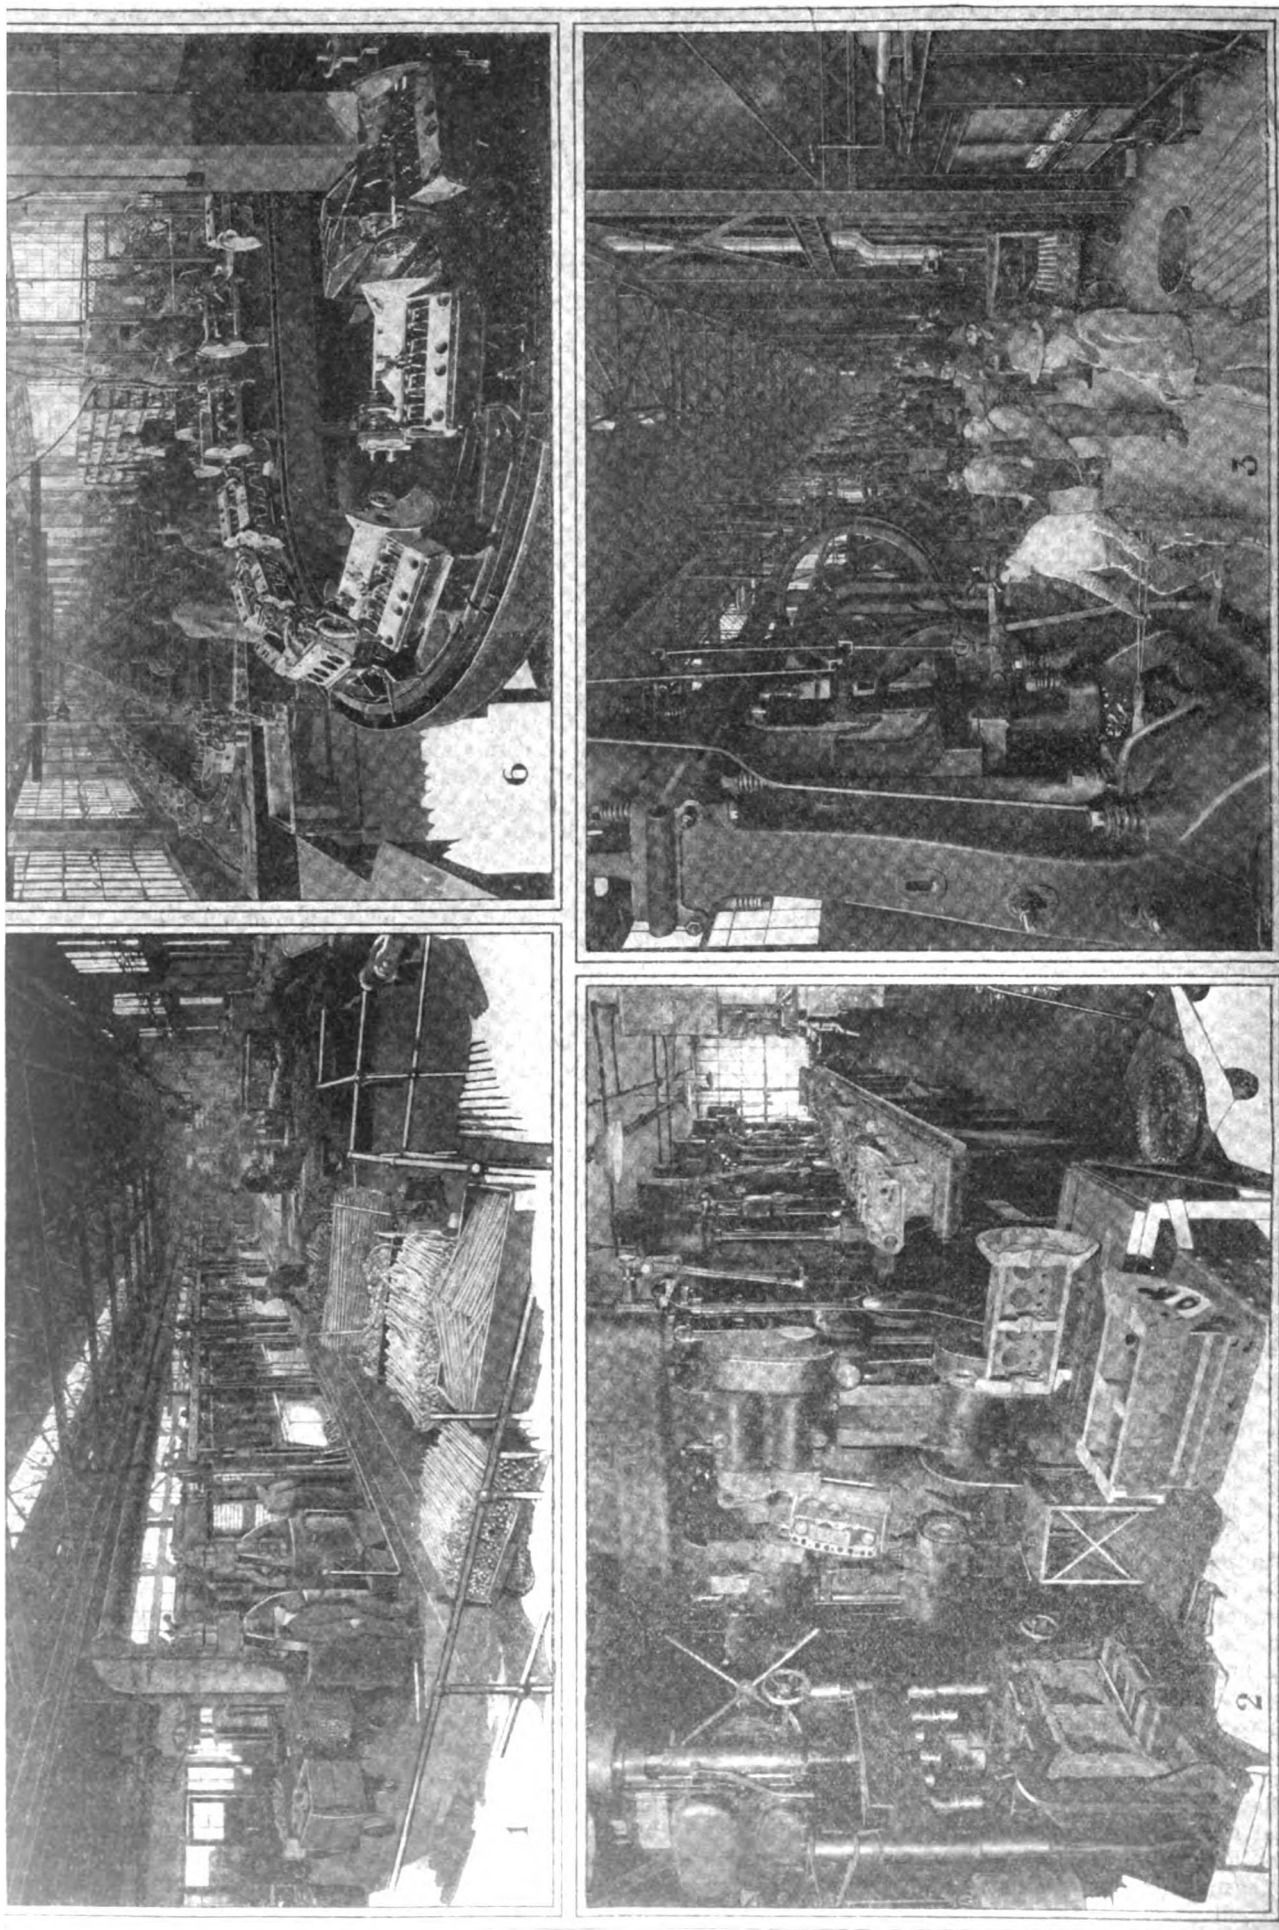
Annealing furnaces where steel parts used in Dodge Brothers cars are heat treated. Fig. 2—Newton rotary milling machine of the continuous type which rough and finish mills the cylinder blocks. The same type of machine is employed for the transmission cases. Fig. 3—Line of steam hammers used in Dodge Brothers forge department.—Note proximity of hammers to furnaces for convenient handling. Fig. 4—Portion of engine assembly department showing how engines are tilted at angle most convenient for operator
